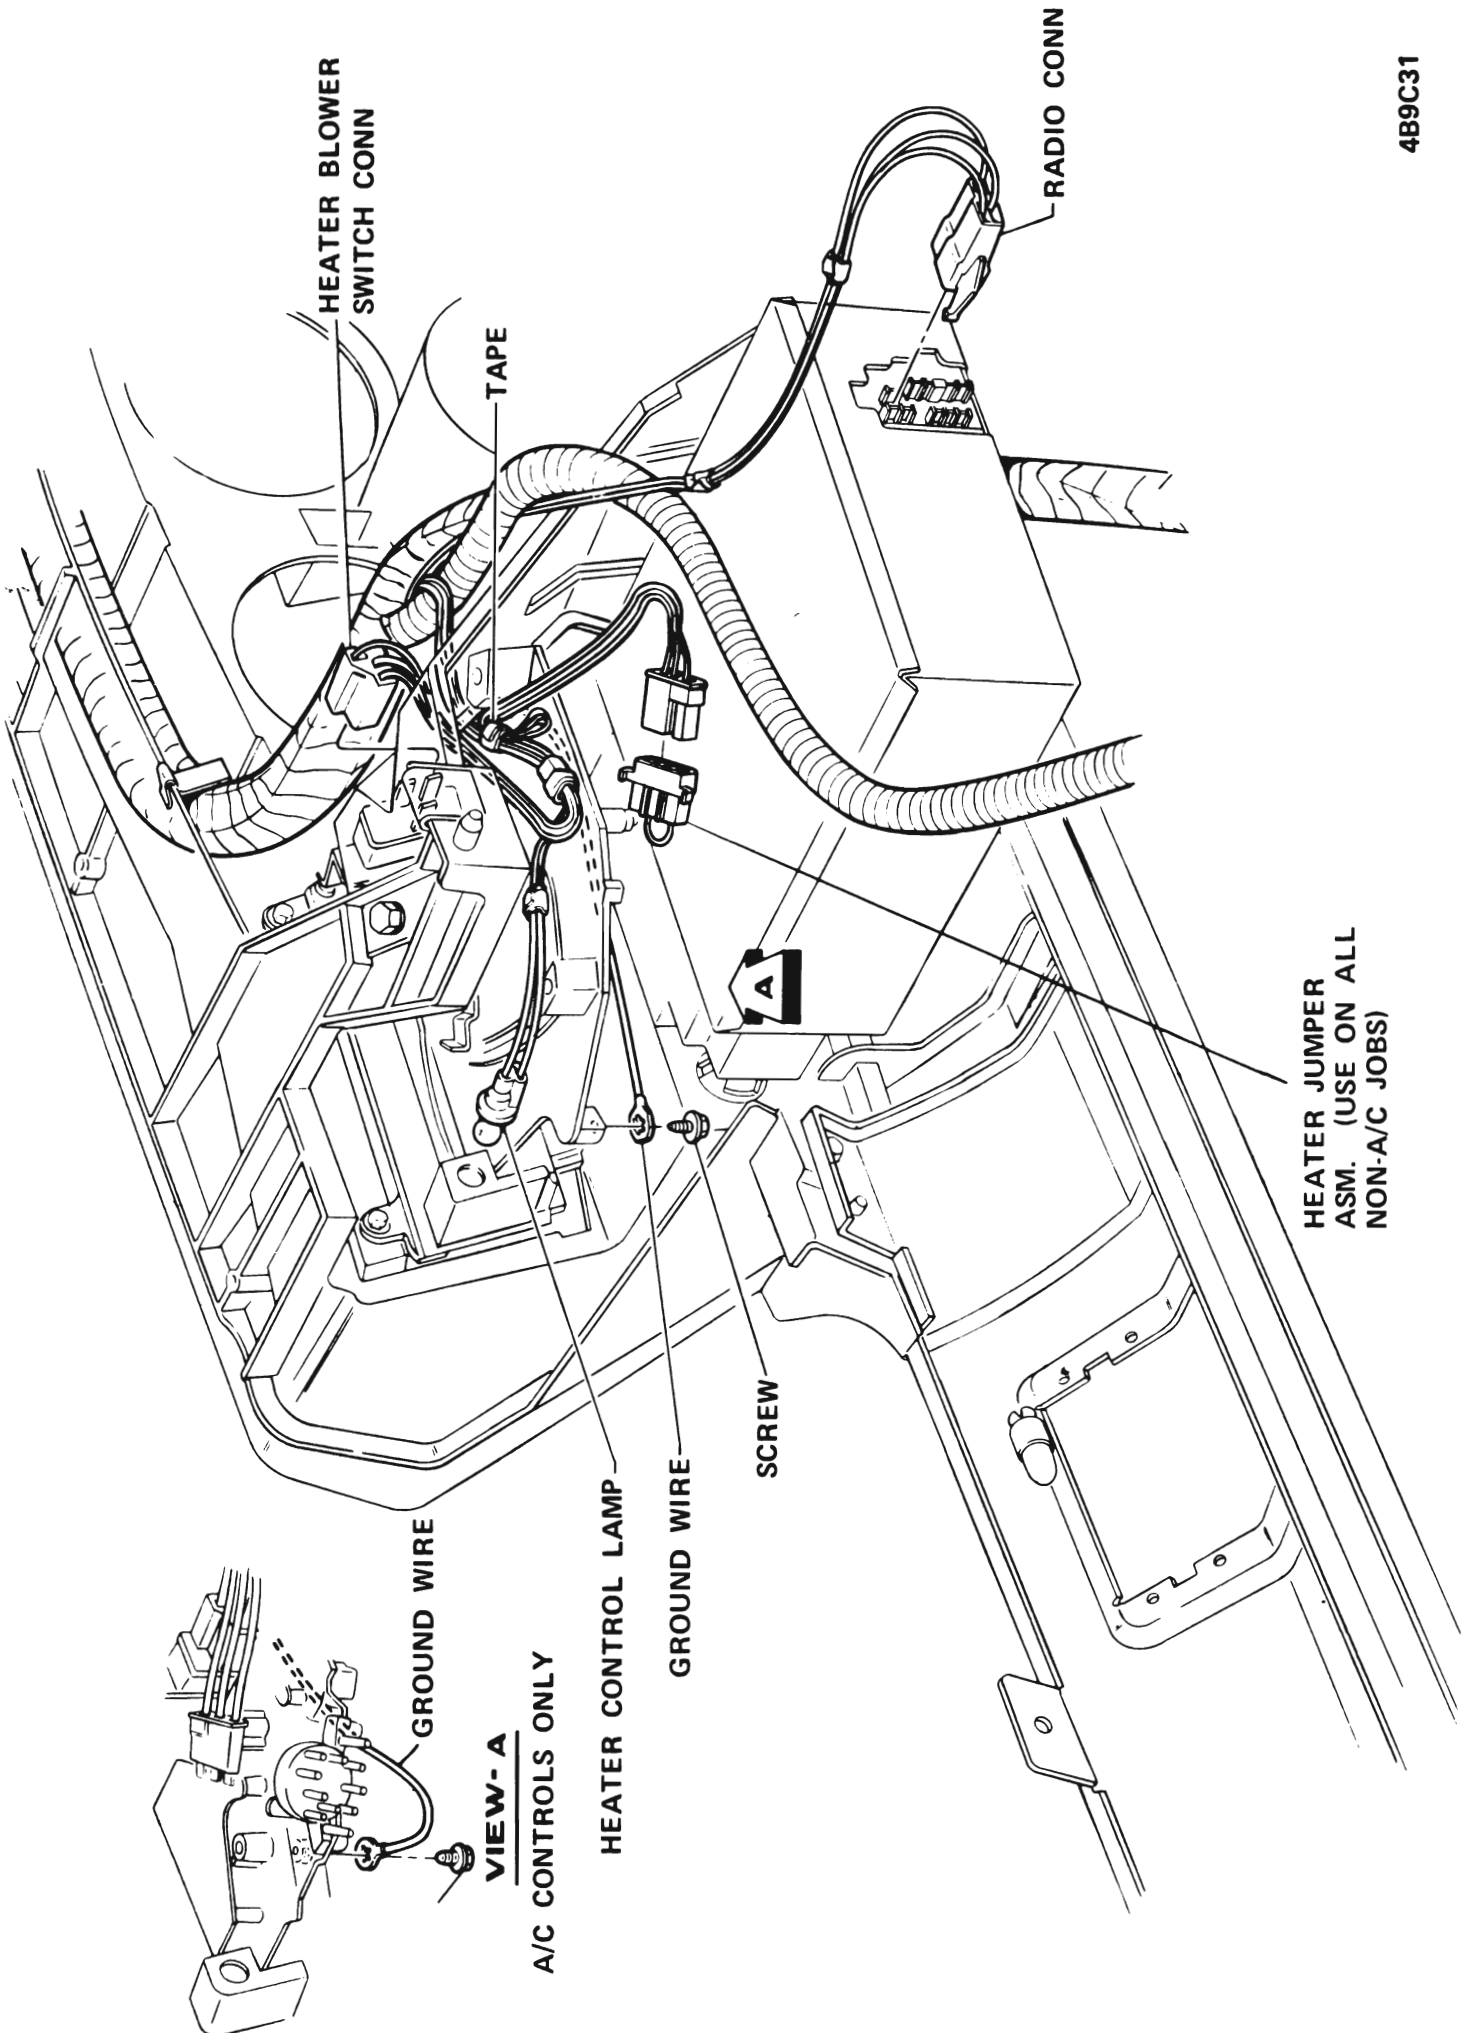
C-42 Wiring - Right Side of Instrument Cluster "A" Series
